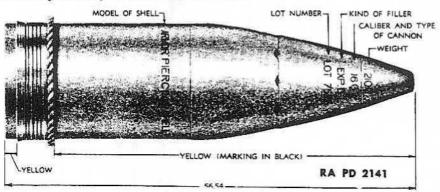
Projectile, A. P., 2100-lb., Mk. II—Mod. 2, 16-in. Guns, M1919-19MII-19MIII, Mk. II—Mod. 1 (Navy), or How., M1920
